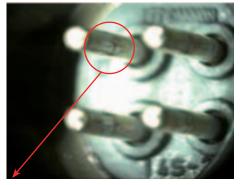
Scratch marks on connector for exhaust valve feed back sensor
